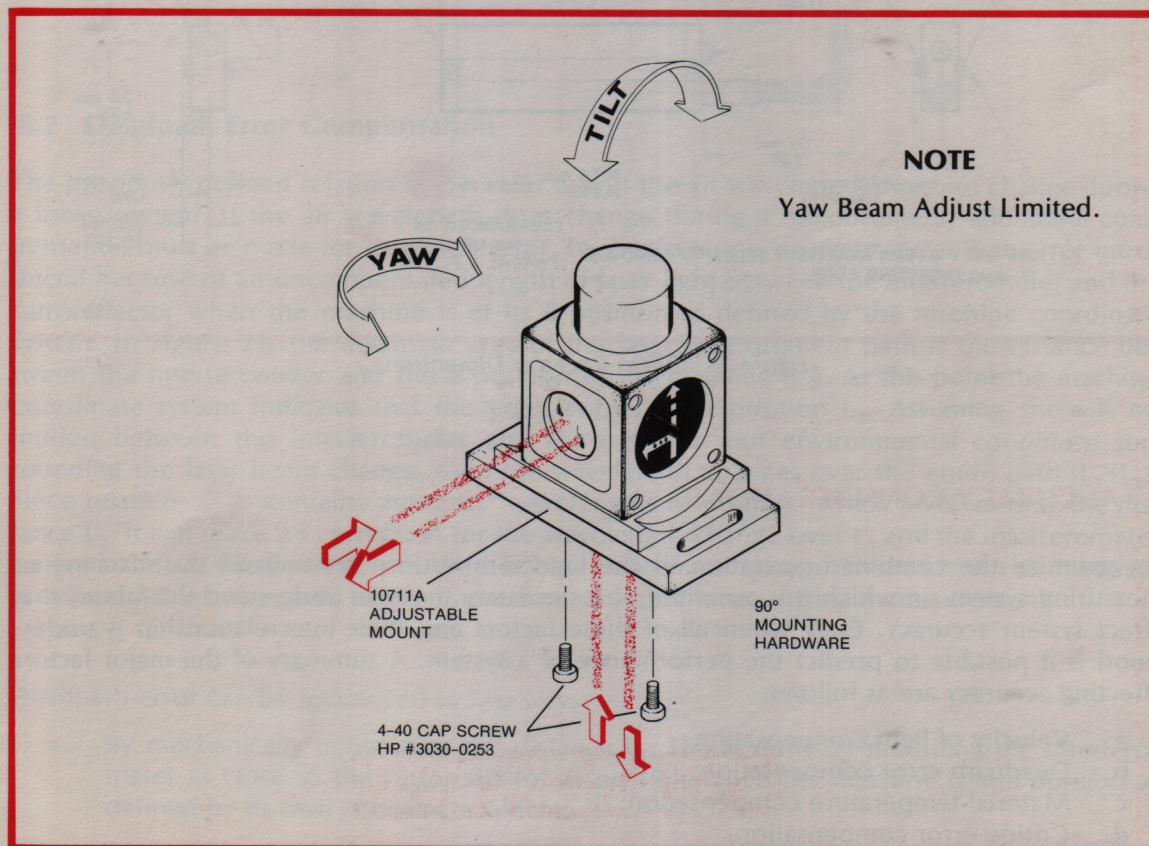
Vertical Plane Mounting Using the 10711A Adjustable Mount
